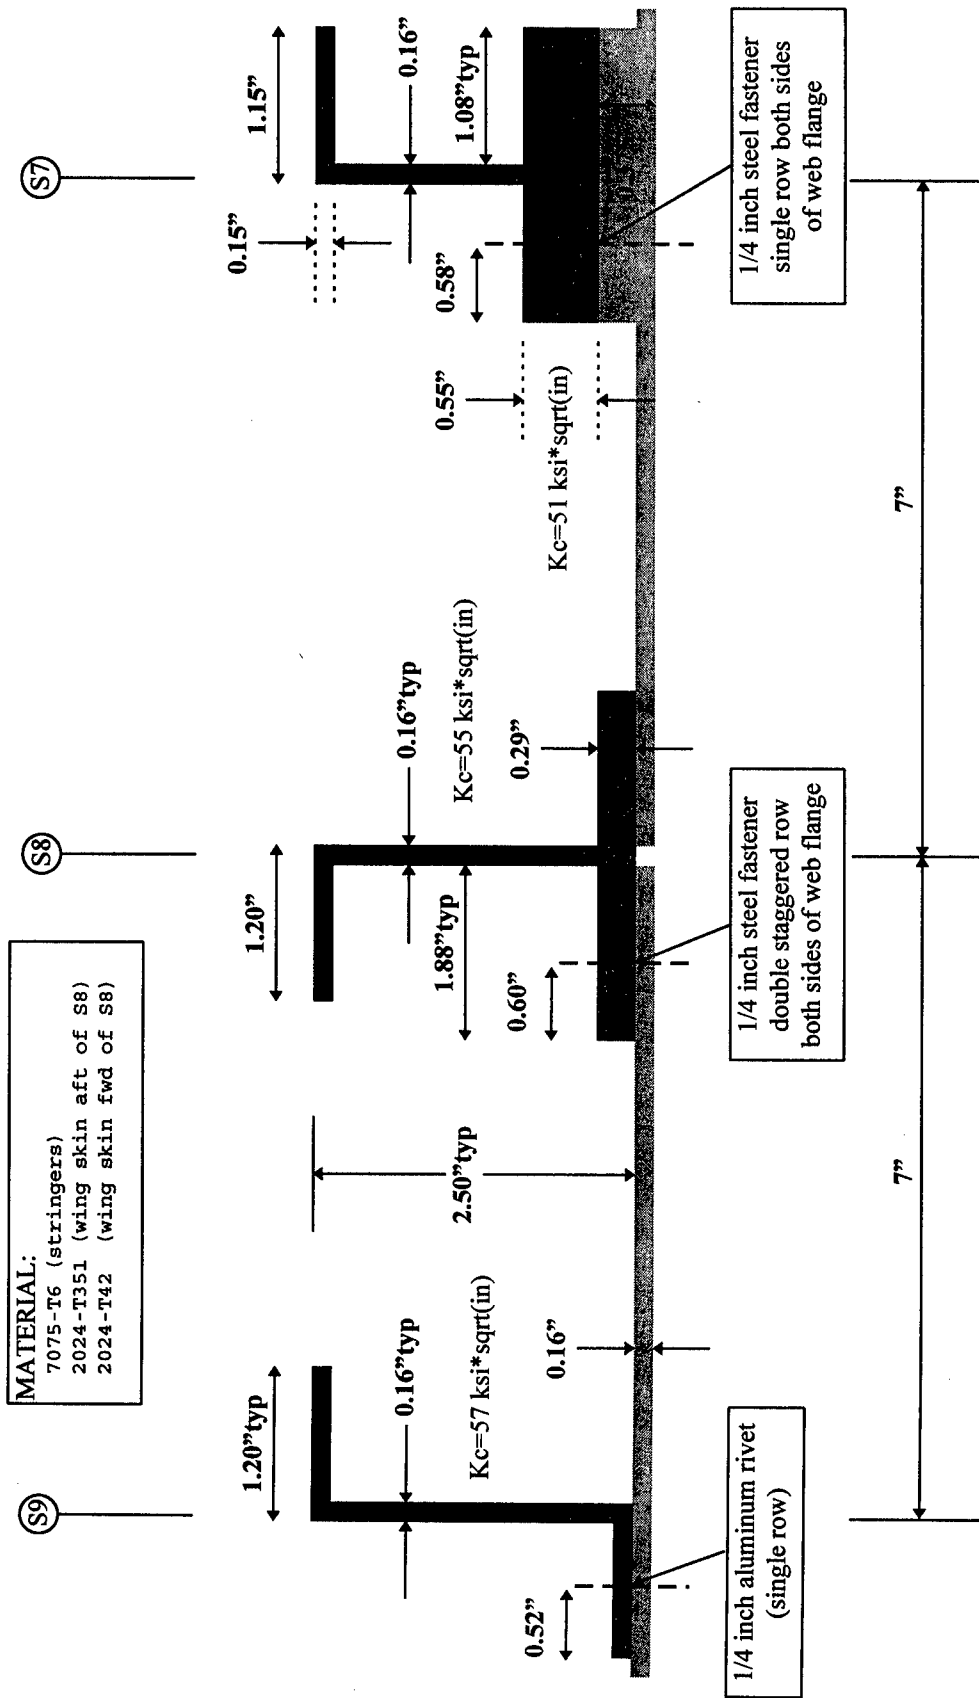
Typical Stringer Lower Wing Skin Cross Section Inboard of Wing Station 360
